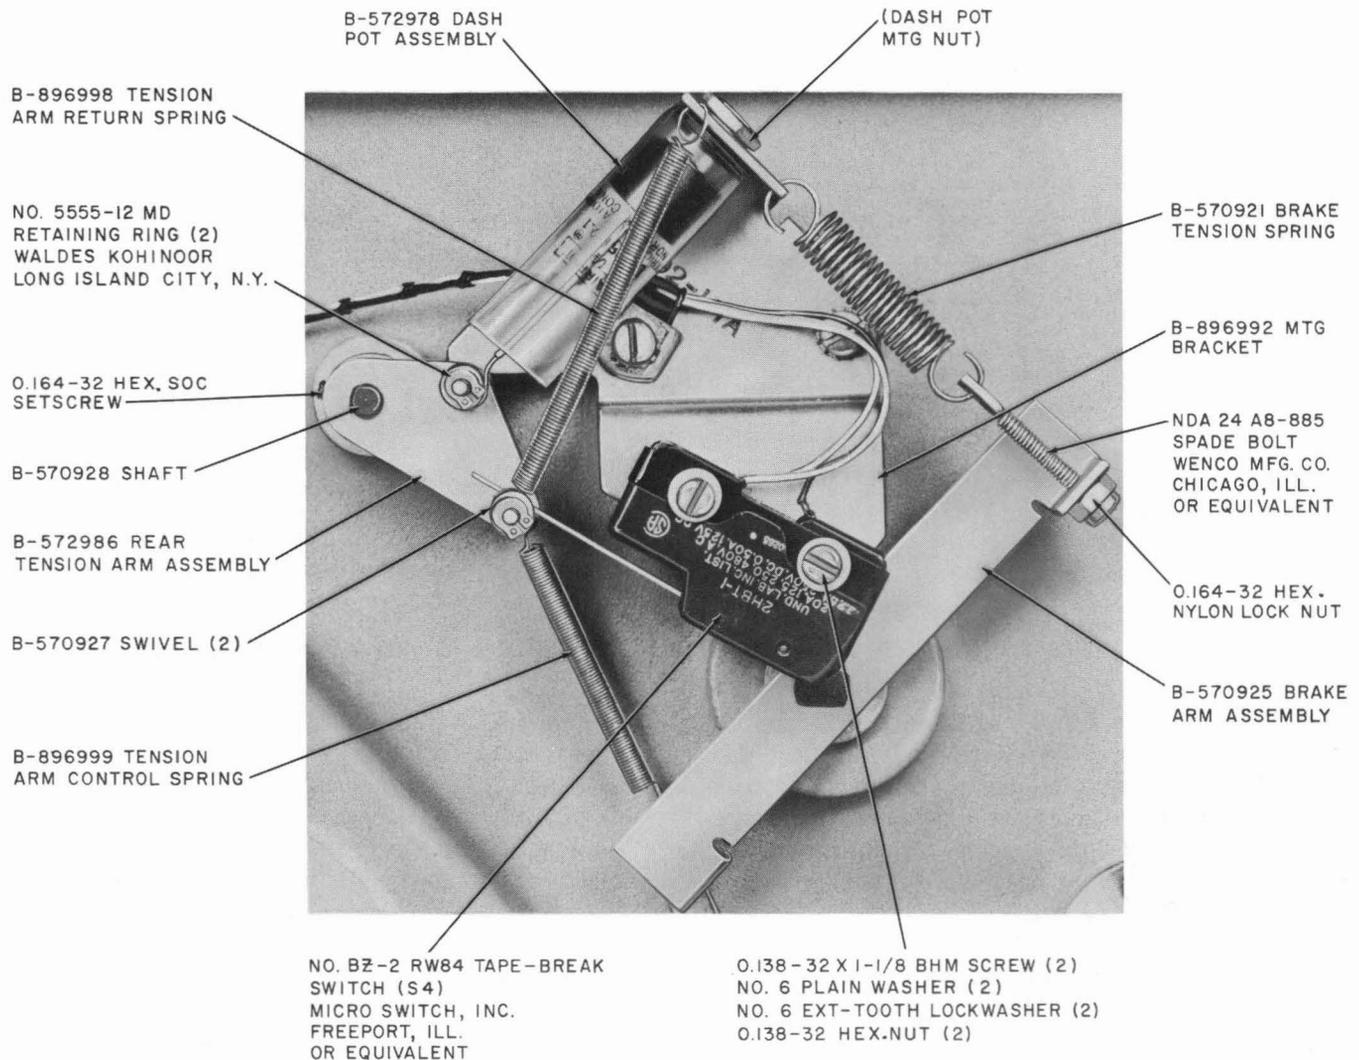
Supply Reel Brake and Tension Arm Assembly
